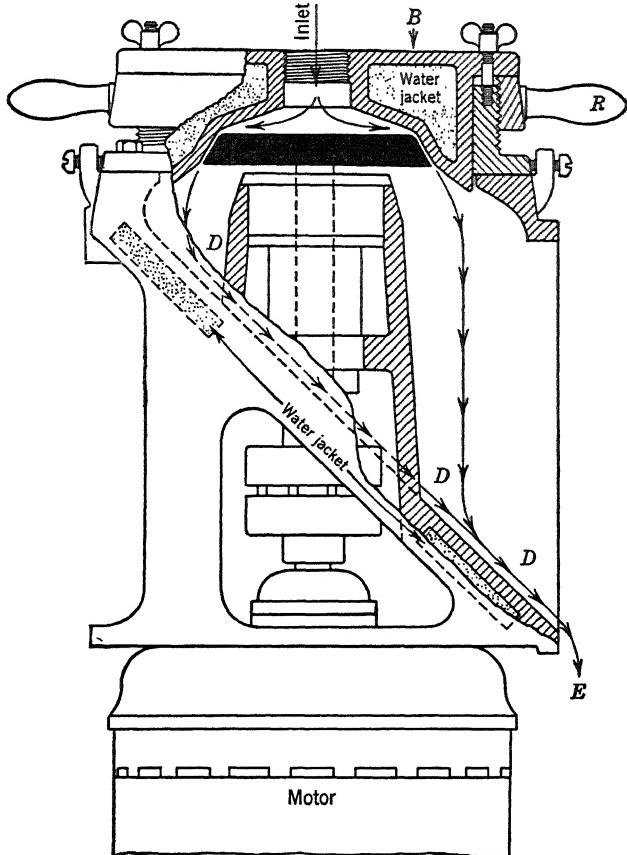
Cross-sectional view of paste-type colloid mill. (B) Stator; (D) spillway; (E) discharge; (R) handwheel for setting clearance. (Courtesy Premier Mill Corporation.)
